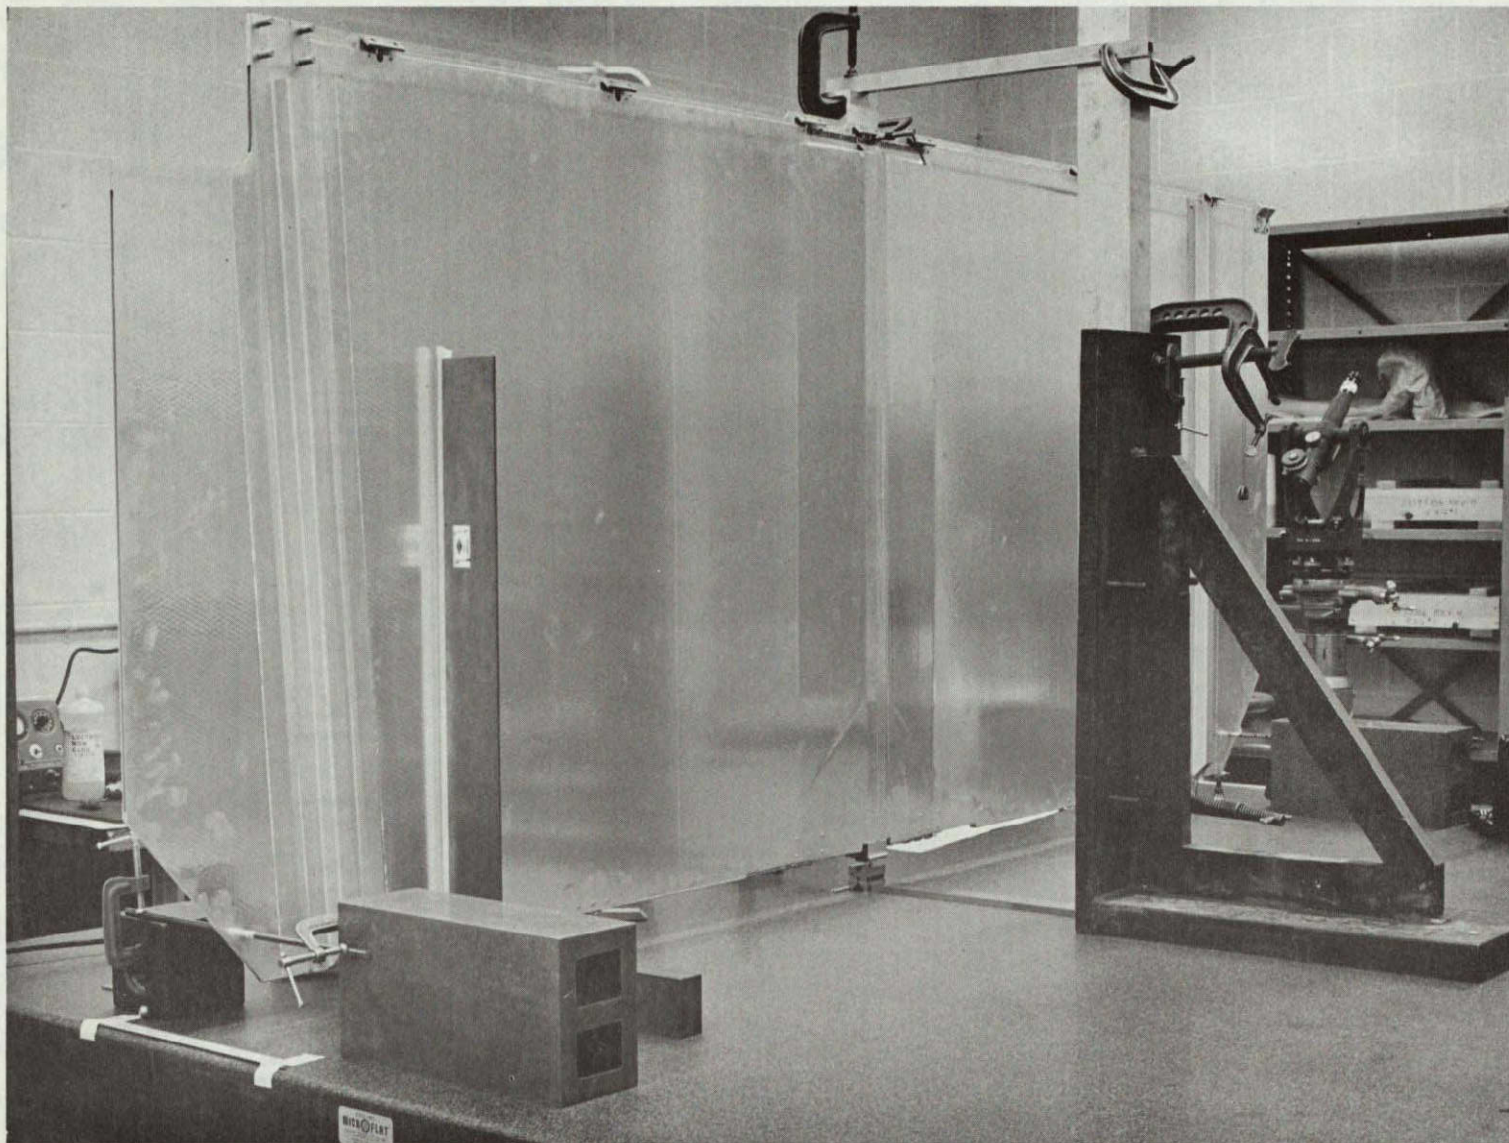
Holding Picture for Dimensional Check, Earth Side Shown
